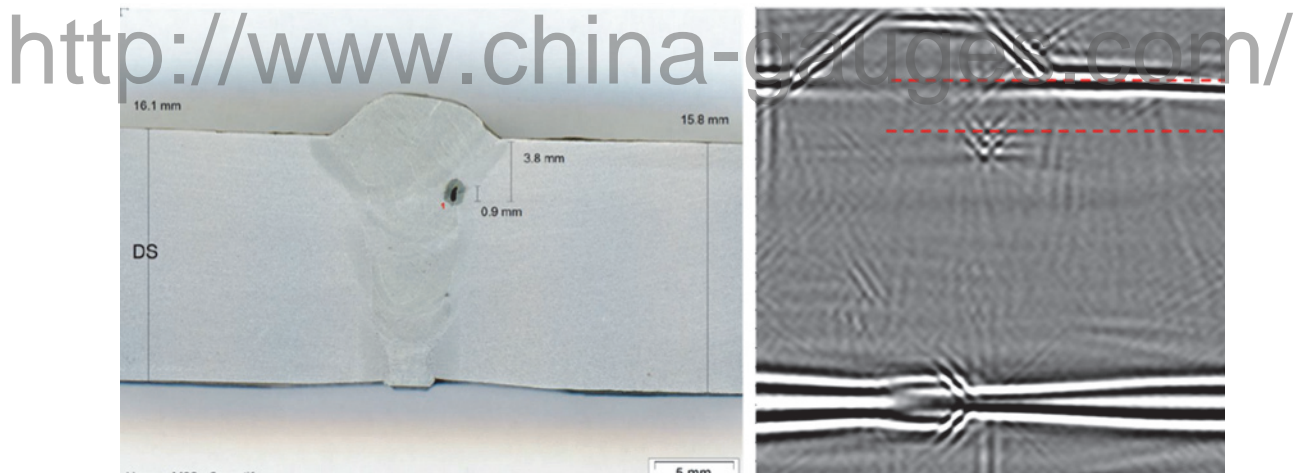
Example of Full Field Inversion of a Weld
